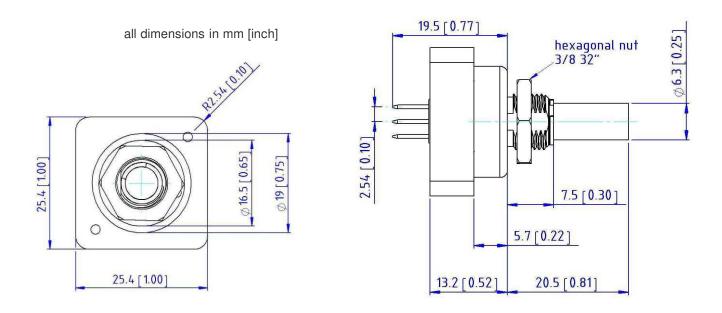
Dimensions of the ED-18-SB-XXXX-X-X (top and side view)
